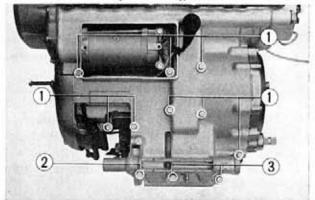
1) 6 mm bolts (2) 10 mm bolt
